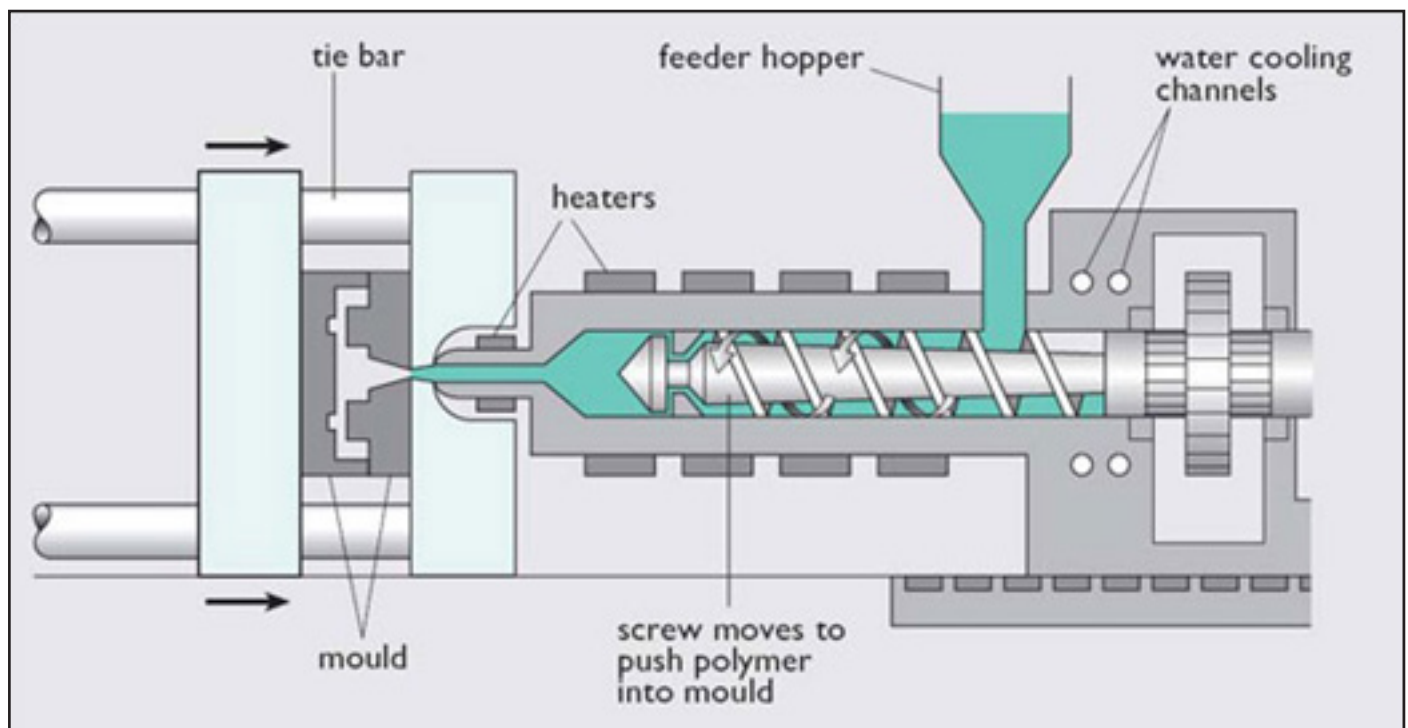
Injection moulding machine (Pentagonplastics.co.uk, 2017)
